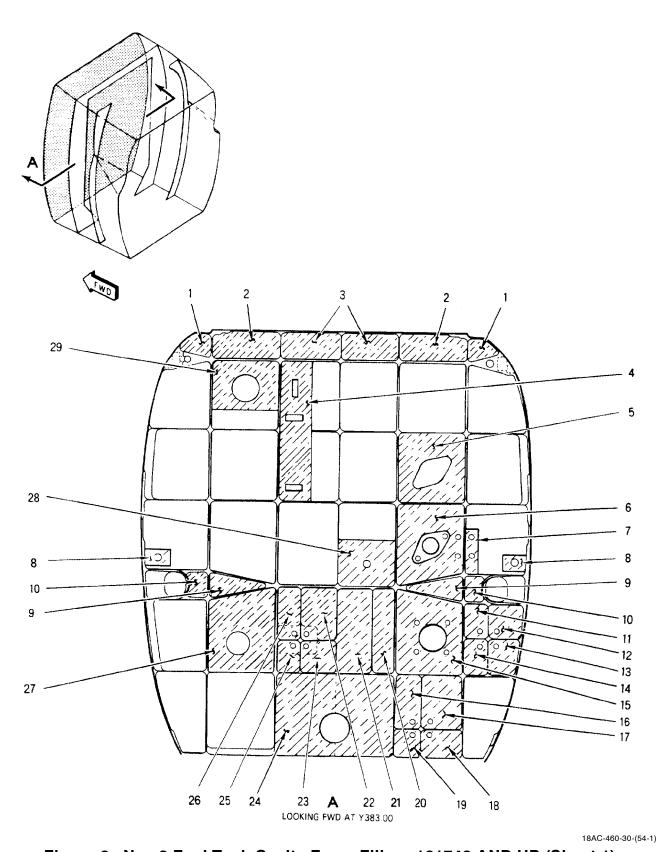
No. 2 Fuel Tank Cavity Foam Filler - 161742 AND UP (Sheet 1)
